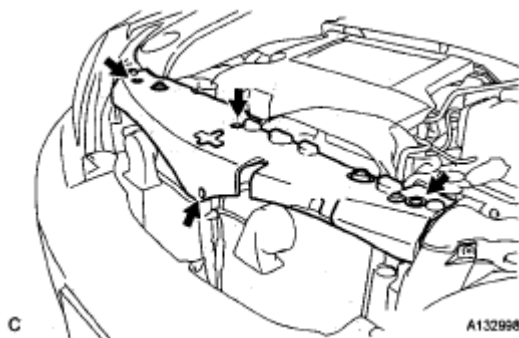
Identifying Cool Air Intake Duct Seal Clips
